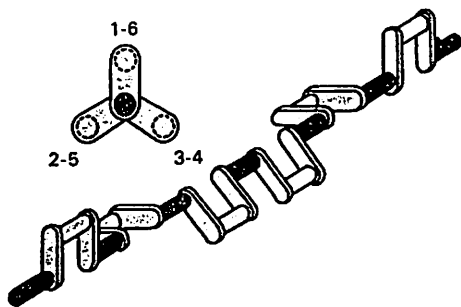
C. A right-hand crankshaft for a six cylinder engine will have throws arranged like this.
